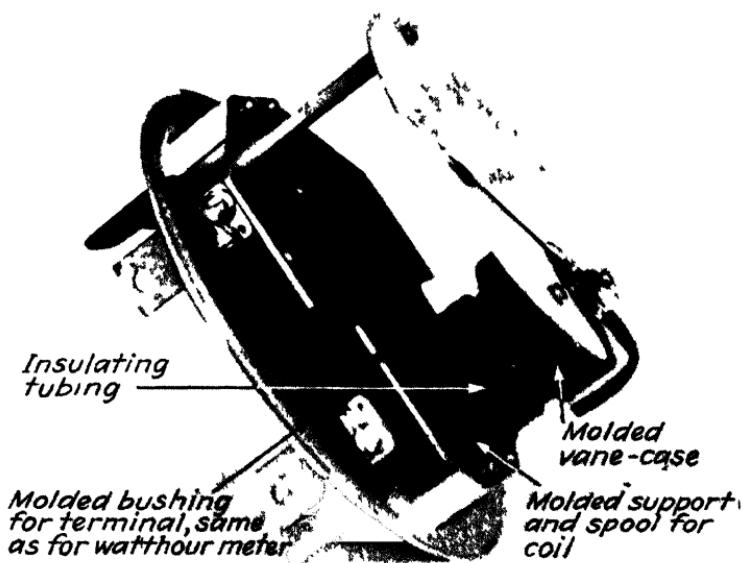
Mounting of moving-vane element (Courtesy of Westinghouse Electric & Manufacturing Co.)
